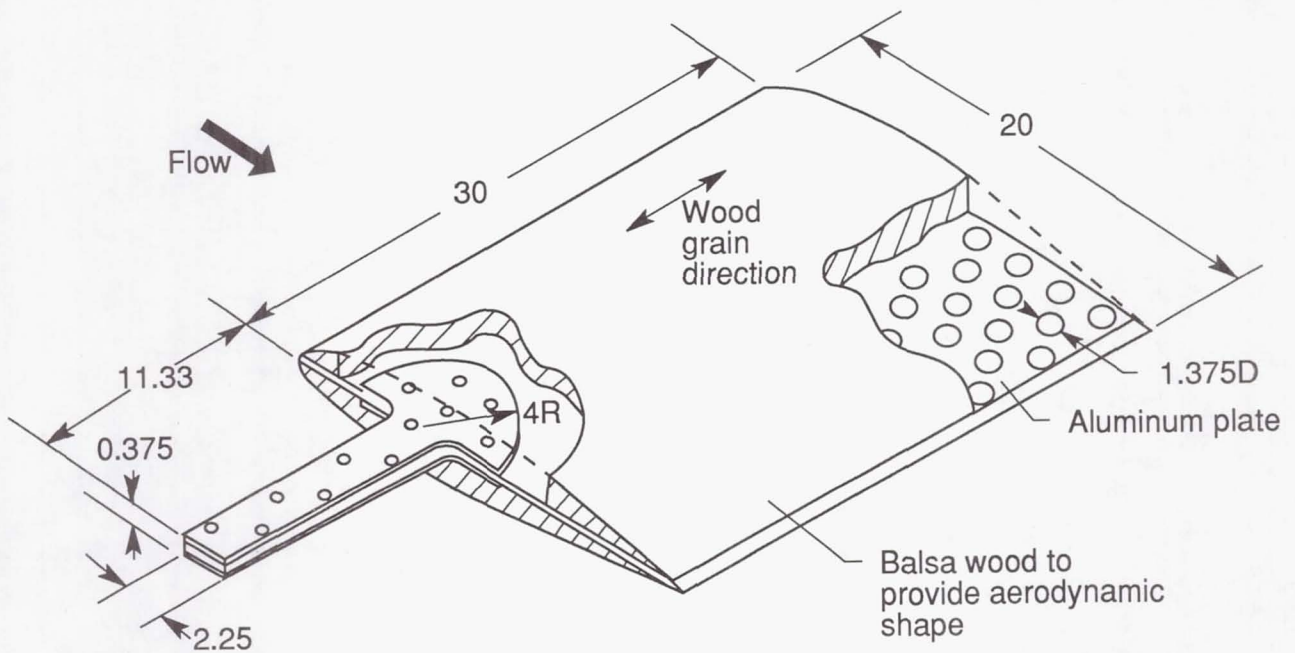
Cutaway drawing showing model construction. Dimensions are given in inches.
